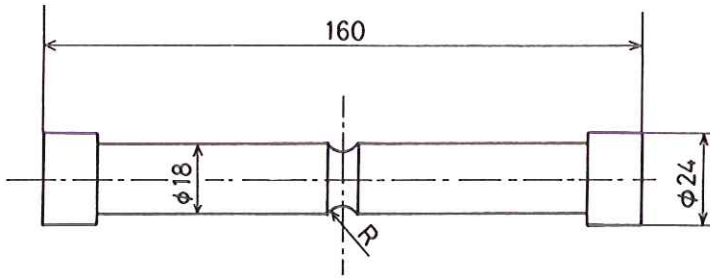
Shape of specimen with notch of root radius R (dimensions are in mm.)
